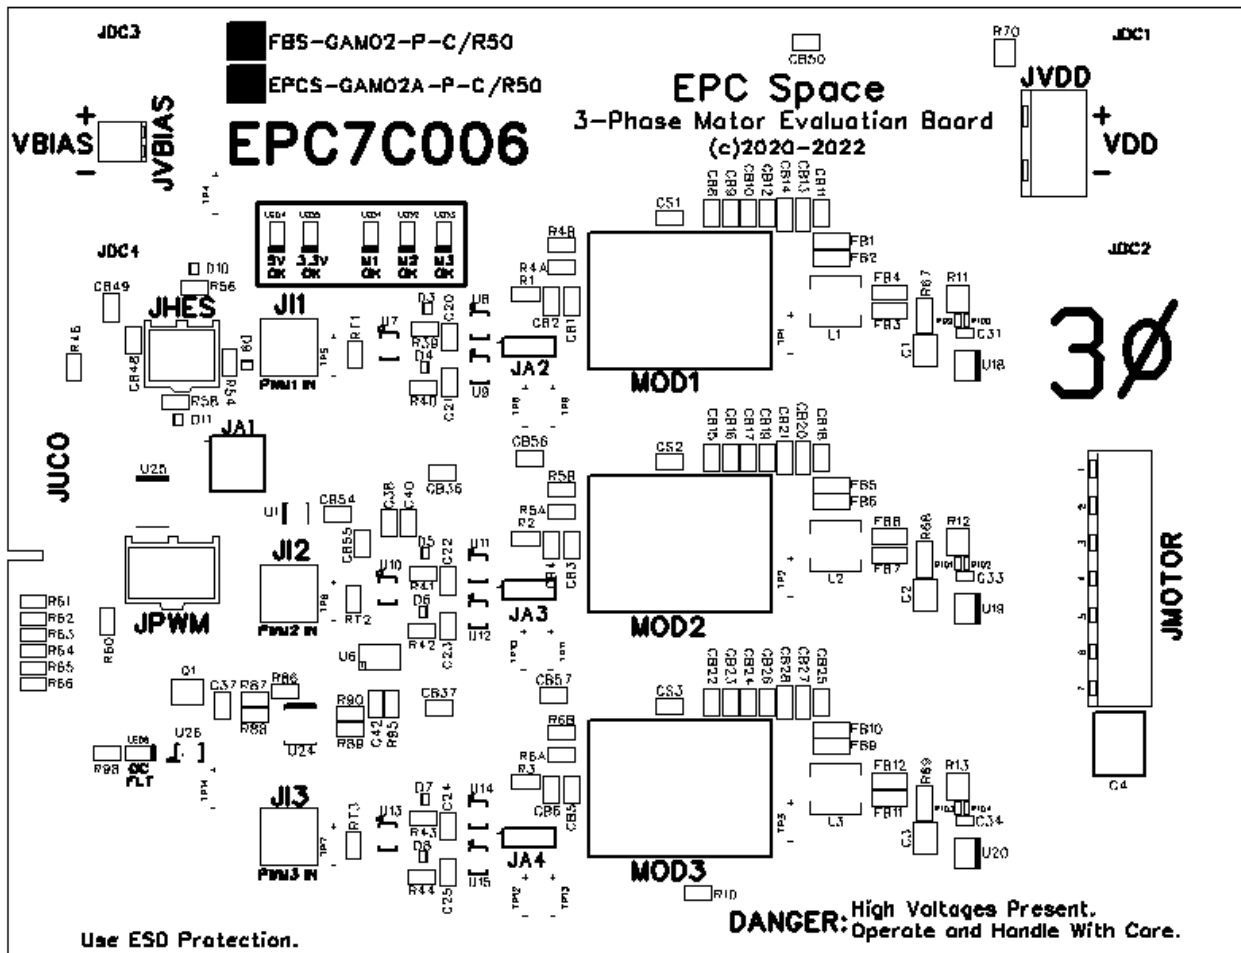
EPC7C006/FBS-GAM02 3-Phase Motor Driver Evaluation Board Top Solder Mask.
